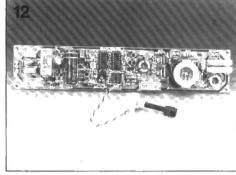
Completed HF controller ready for fitting into the tube armature.
